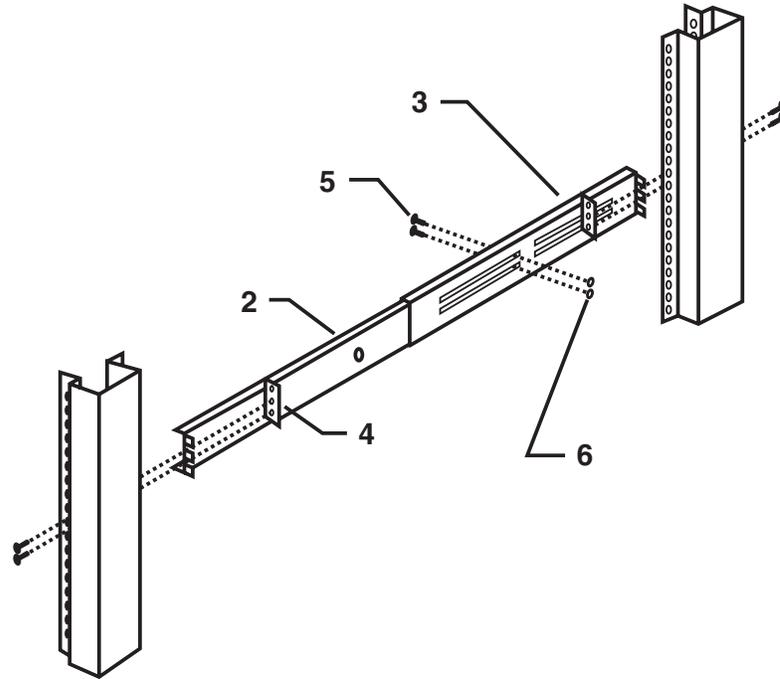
Installing the Rear Brackets on the Slides and Attaching the Slides to the Corner Posts.
